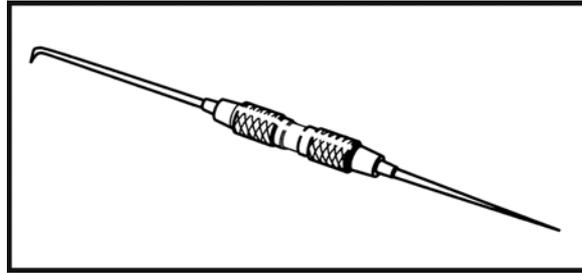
, A Scribe is typically used with layout dye to mark reference points on a material. However, scribe marks should never be used for bend lines as they cause stress concentrations that can lead to component failure.
